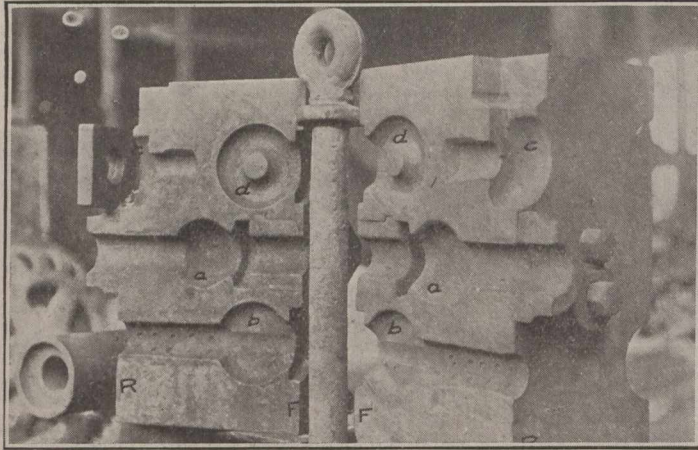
Dies for Forging Eyebolt in Forging Machine.
